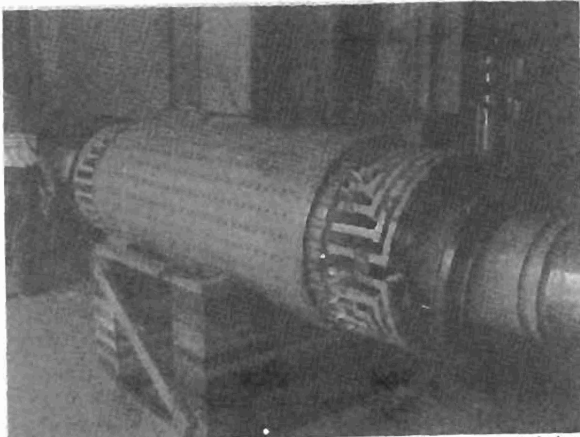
STG #40 Generator Rotor retaining removed. Exciter and coupling side view, as opened.
